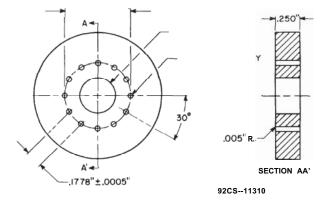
Gauge Drawing JEDEC No. GE11 -1
